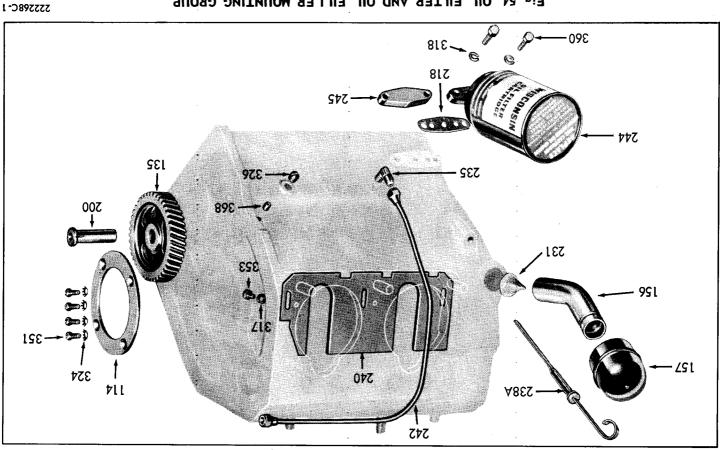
, OIL FILTER AND OIL FILLER MOUNTING GROUP Parts are identified by reference number. See parts list for correct part number.
